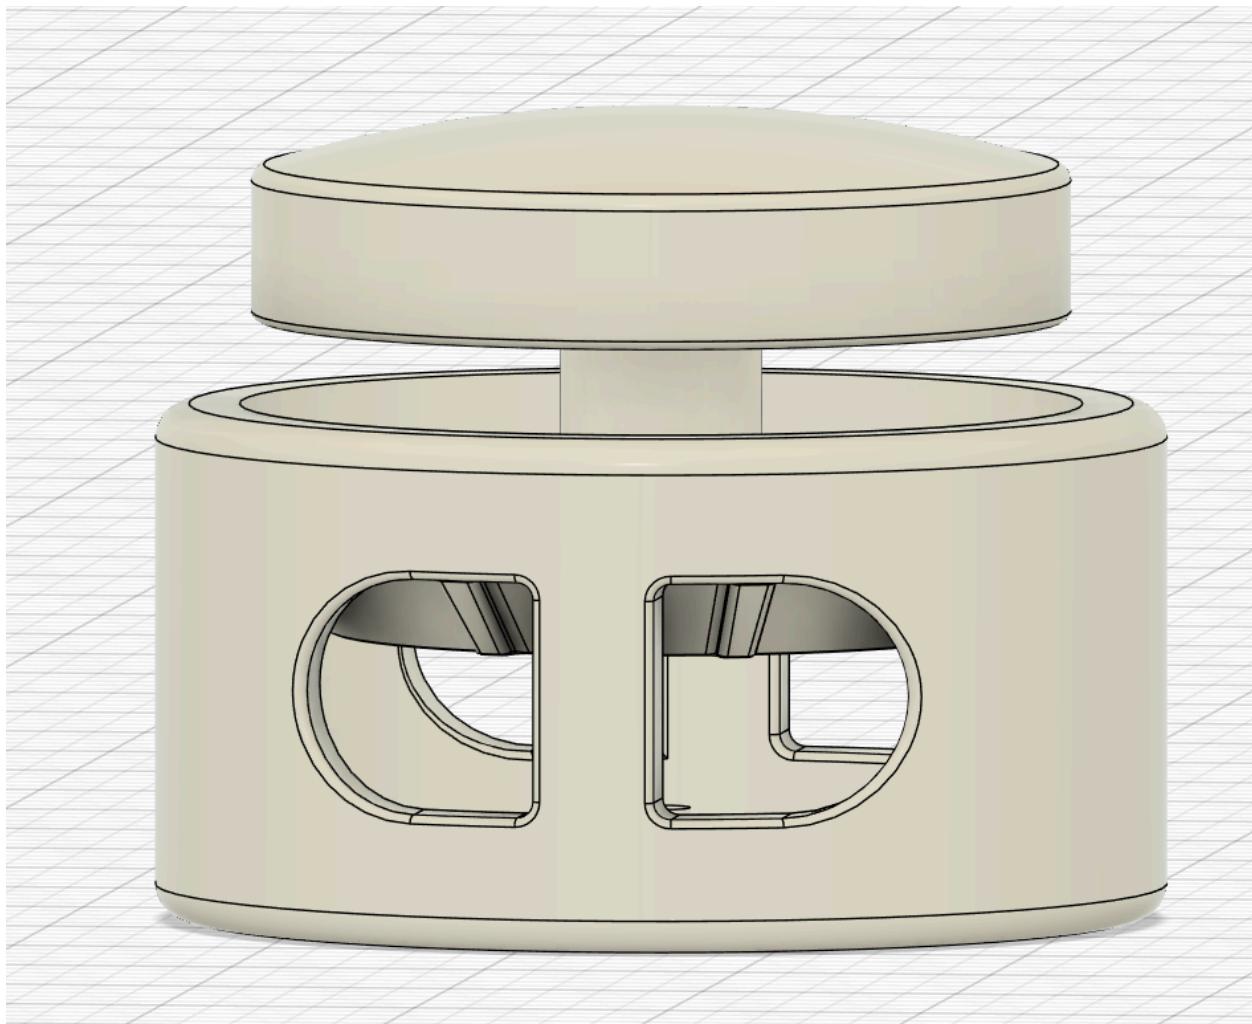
Finalized CAD model for spring-cord lock mechanism in order to secure and adjust vibration motors.
